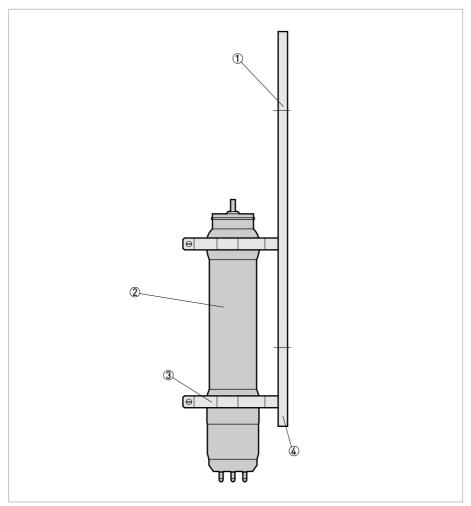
Mounting to MAA 2000 slide rail immersion holder
